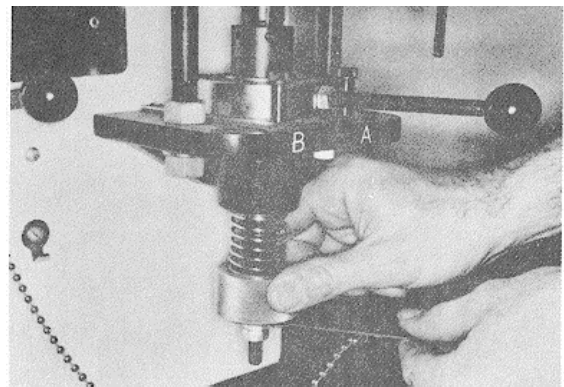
, F60173. Adjusting knurled nut for feeler gauge clearance
